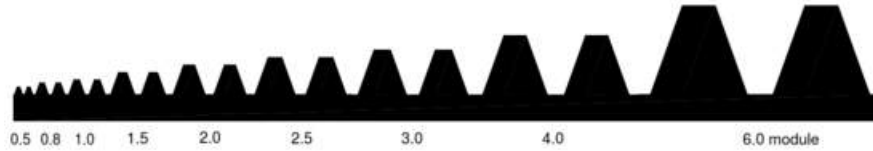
Relationship between gear tooth size and module. Source: [62].
